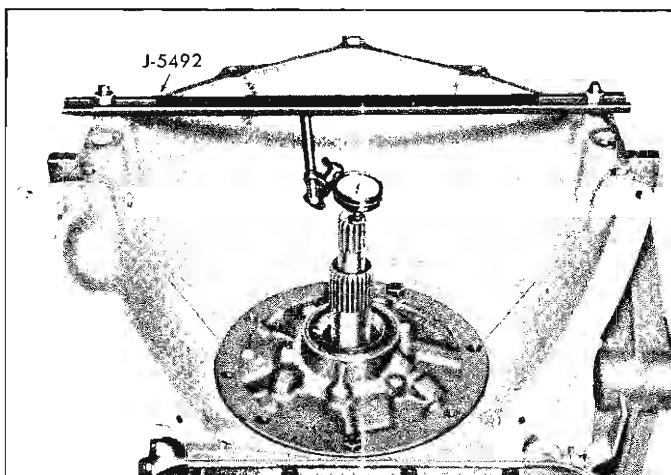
Checking End Play for Proper Thrust Washer Selection
